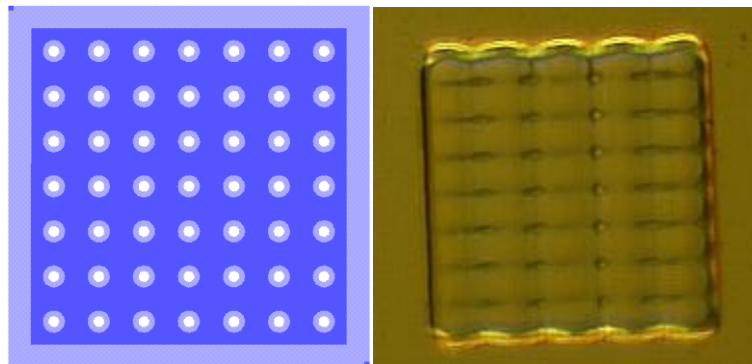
Micro-contact design in L-Edit specified by DOE run #1 and the resulting design after fabrication.
